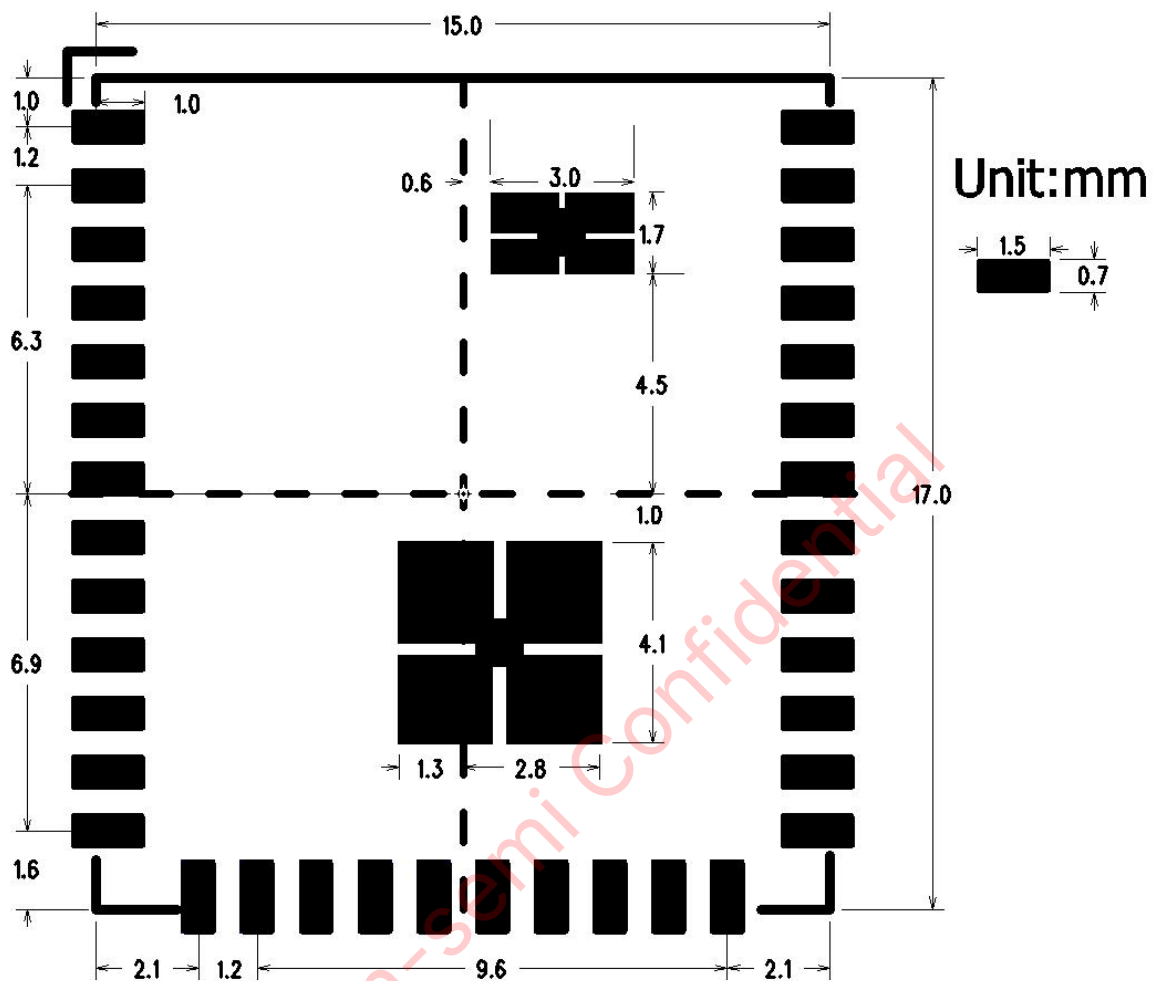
TX-AH-Rx00Pxx Module PCB Package Dimension
